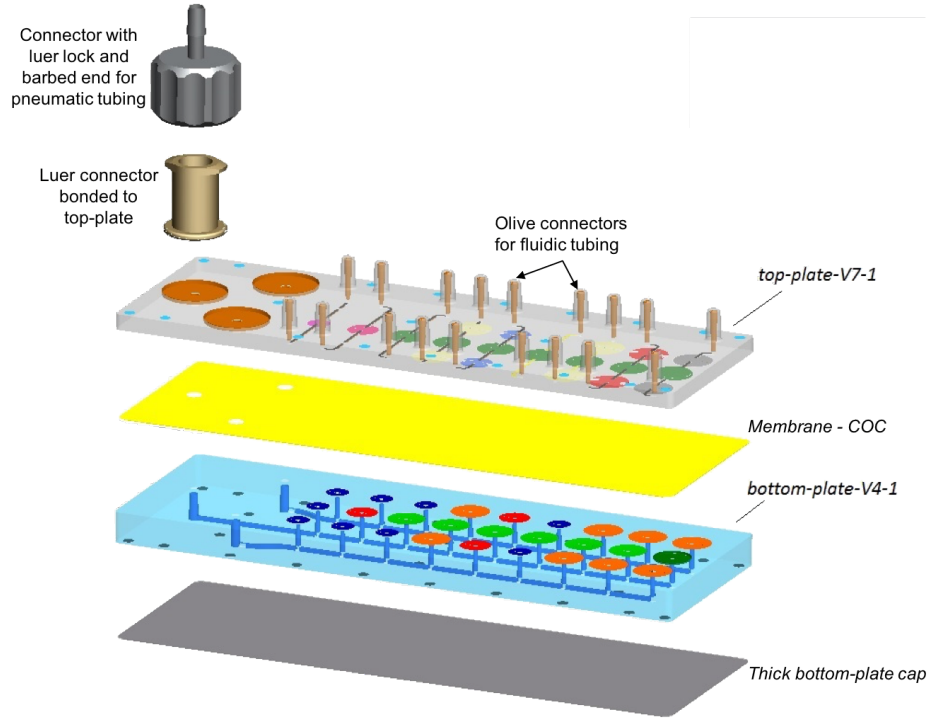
Exploded view of the single-use injection-molded platform showing various layers which are bonded together. Design details for each component are discussed in Chapter 3. Image by microfluidic ChipShop GmbH.
